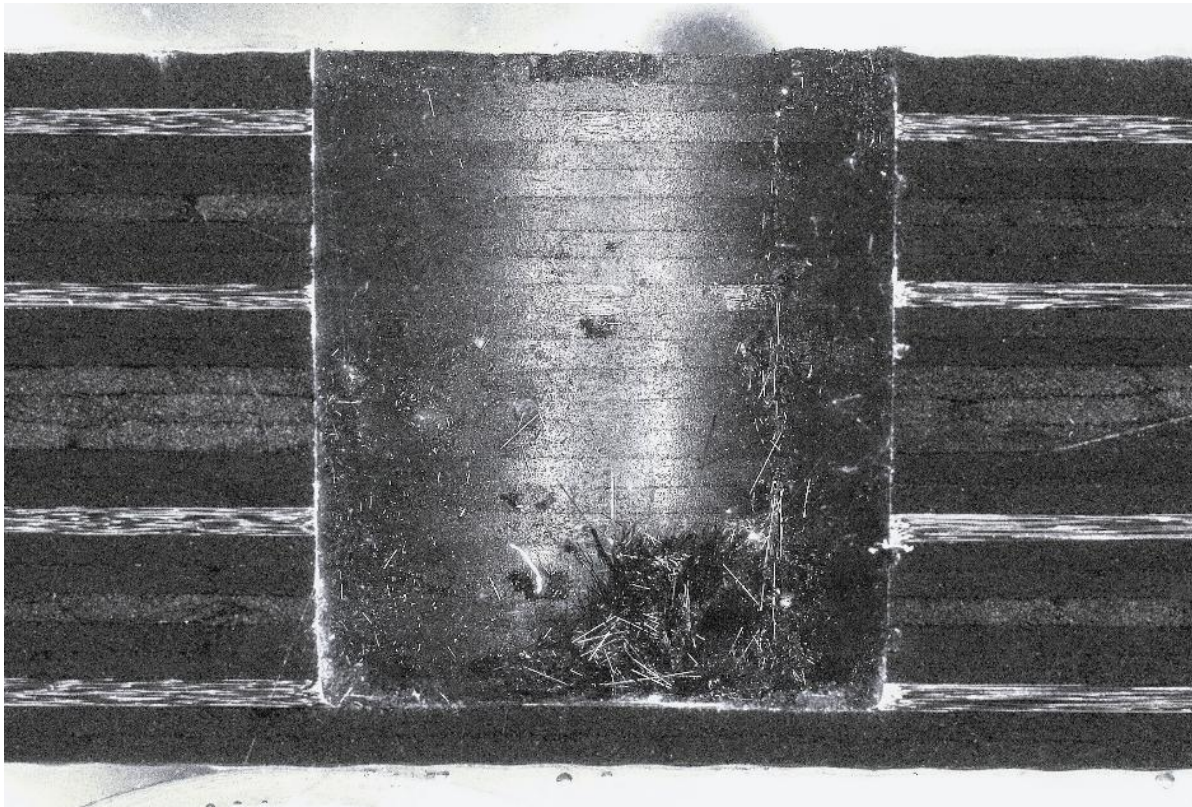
Hole NV-02: Drilled hole without vacuum jig of specimen CSAI - RPR - S - 20J - 1.
